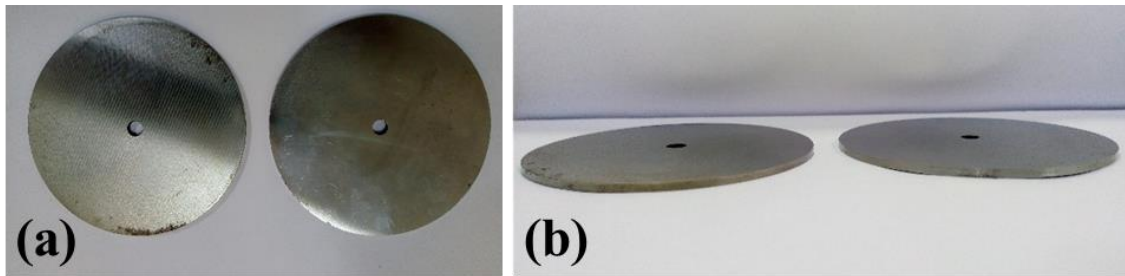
Steel disks (a) Top view (b) Front view.
